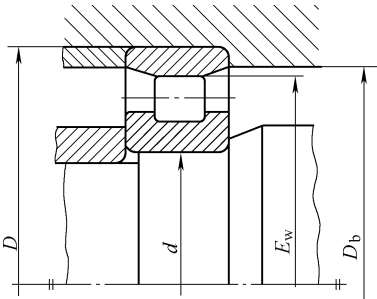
25 N type cylindrical roller bearing installation dimension
